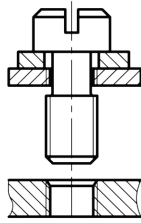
The assembly unit obtained by the transformation of the construction in Fig. 1
